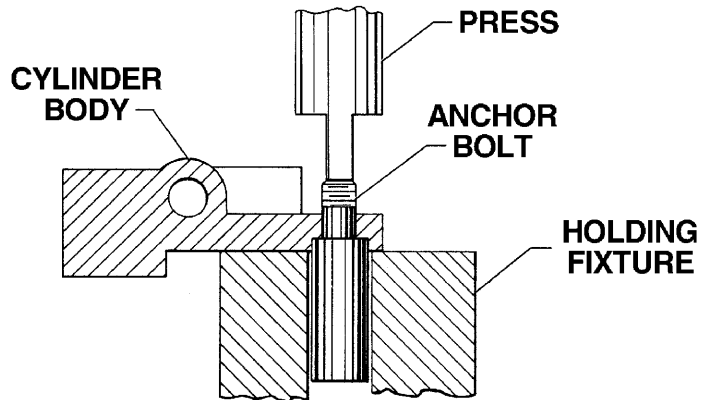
Wheel Brake Assemblies – 30-65 and 30-83
